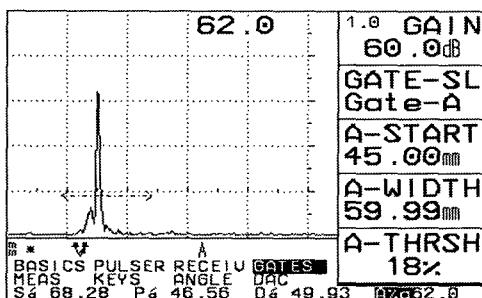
Ultrasonics signal of rail weld zone (flange part)
